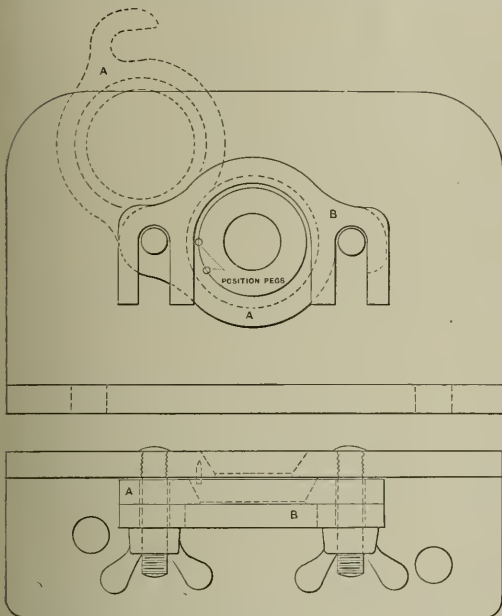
Detail of Holding Device for Drilling Firing Rings.
